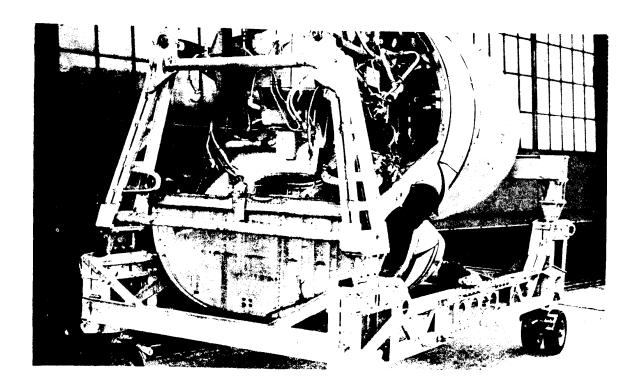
Trailer 55J9109 with KC-97 Power Package Installed, Right Rear Three-Quarter View
